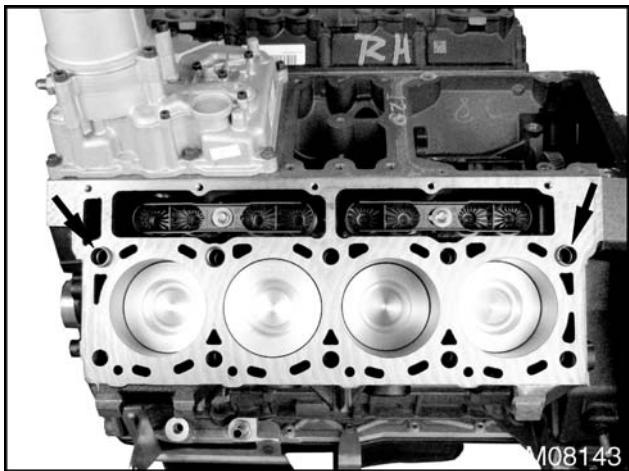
Cylinder head spring dowel pins in crankcase (typical)
